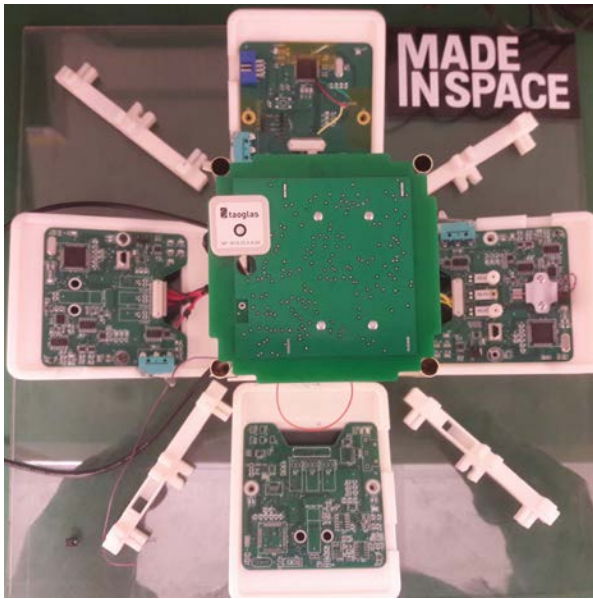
MakerSat-1 electronic board “flower-petal” ready for shipment to ISS and snap-together assembly by the crew.
